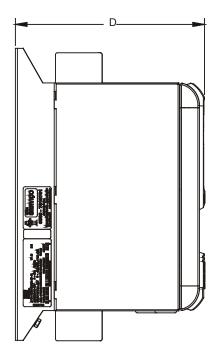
Dimensional Drawings of the Soft-Starter SSW-06
